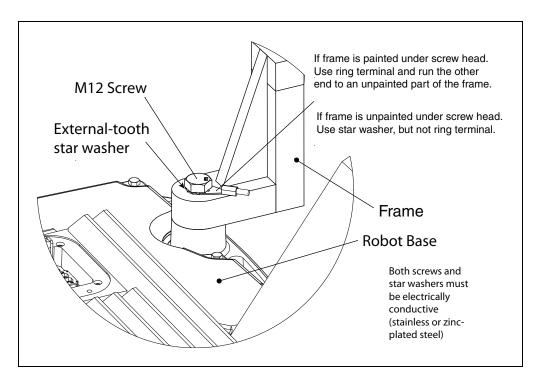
Any of the Three M12 Mounting Screws can be used for Grounding.
